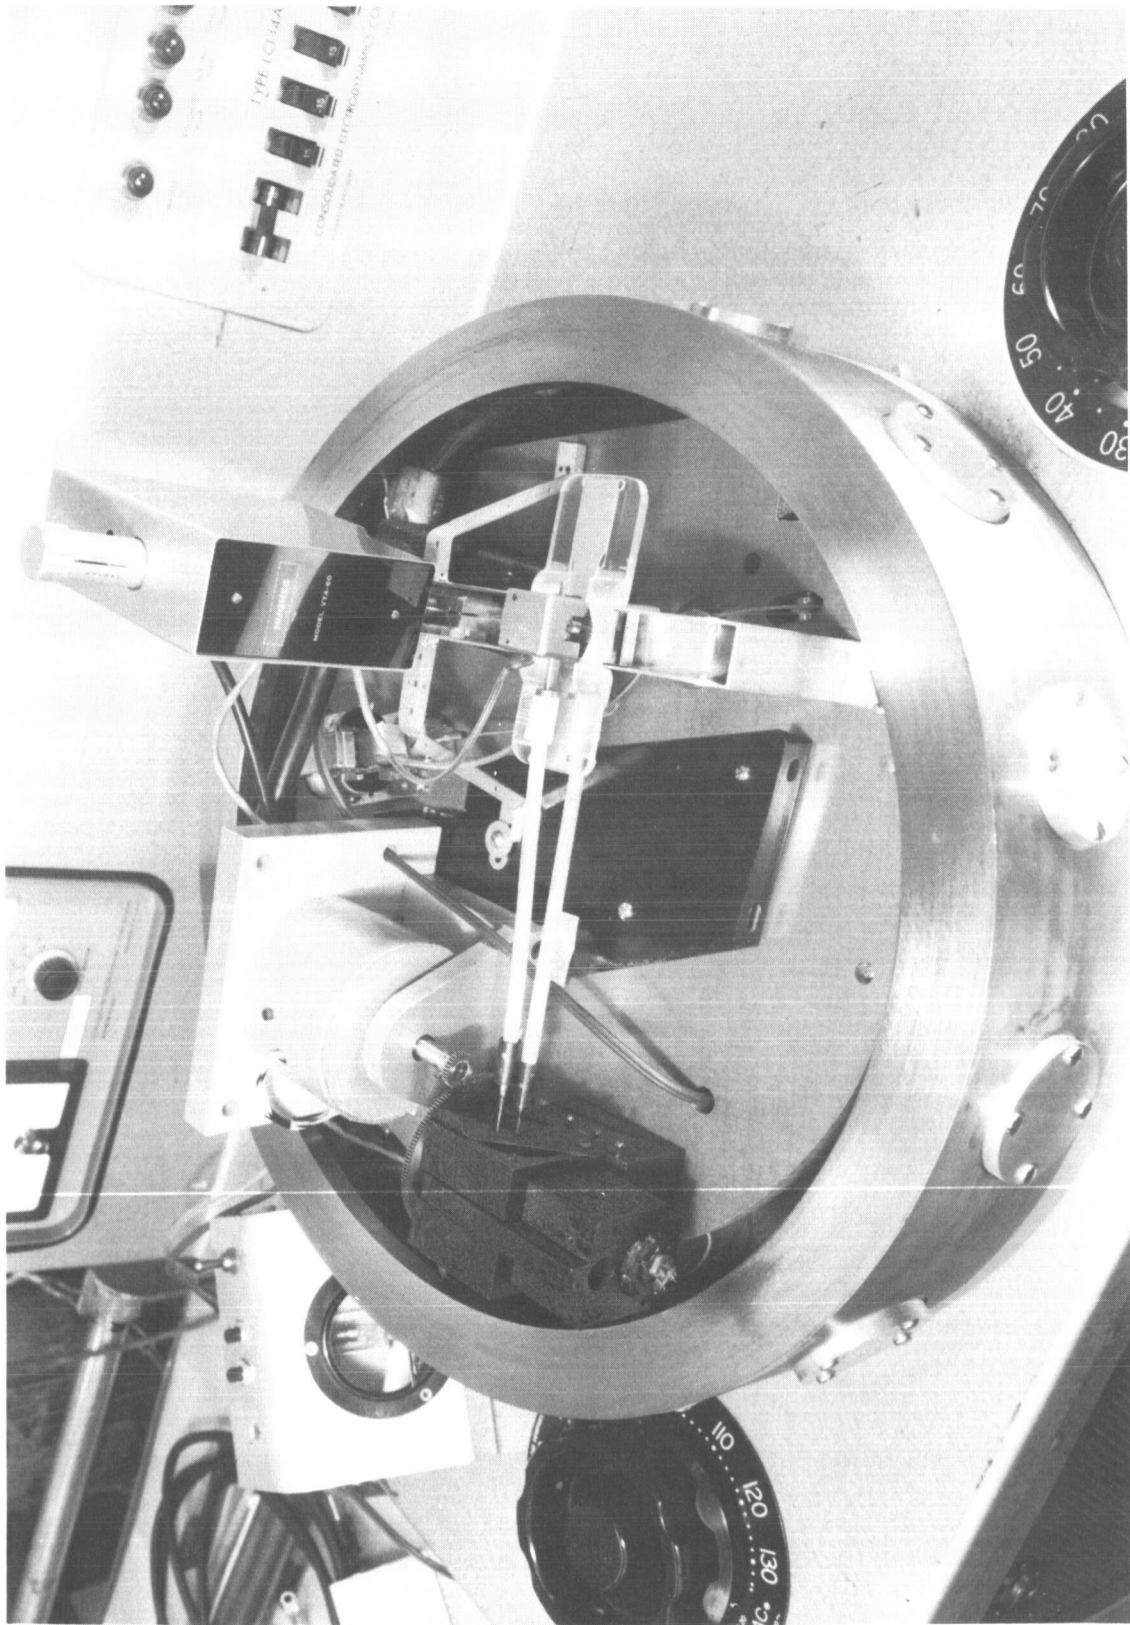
Resistance seam welding equipment set up for welding/soldering/brazing in a vacuum environment. (R113288)
